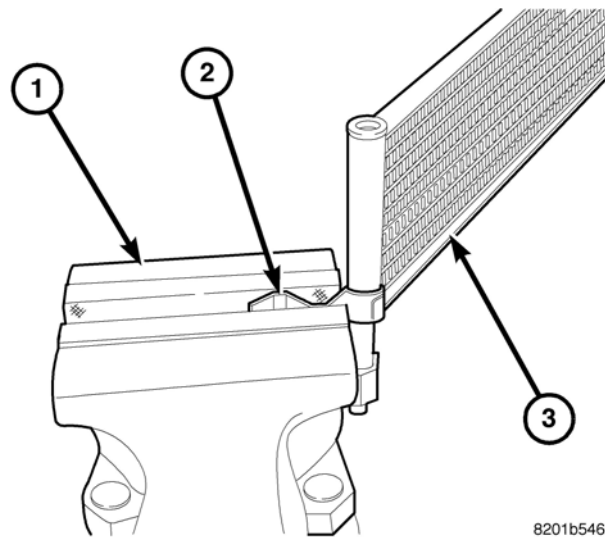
STRAIGHTENING RIGHT TRANSMISSION COOLER BRACKET
